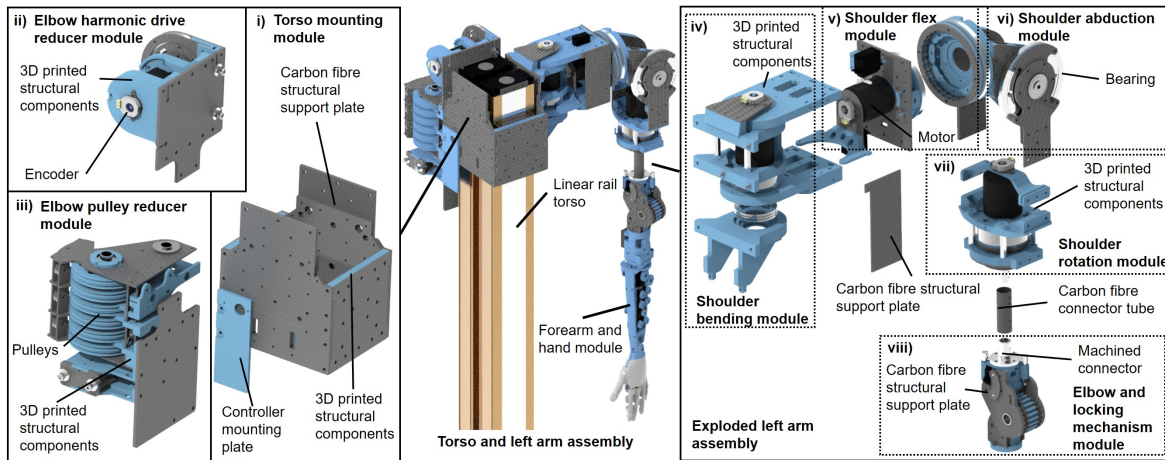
Annotated exploded view of the: i) torso base assembly, ii) and iii) Bowden cable drive modules for the elbow, iv) to vii) shoulder modules, and viii) the elbow module and locking mechanism. The torso base consists of four carbon fibre-reinforced plates providing the basis and mounting point for the robot arms, control electronics, and elbow drive mechanism.
